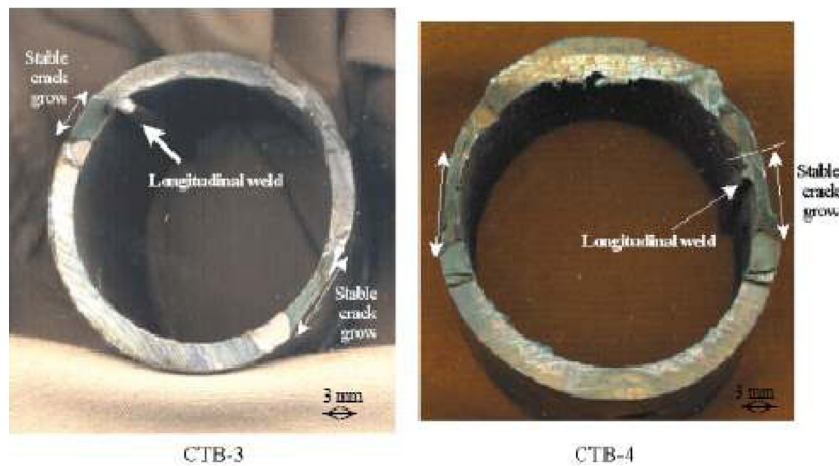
Stable crack growth through the longitudinal weld
